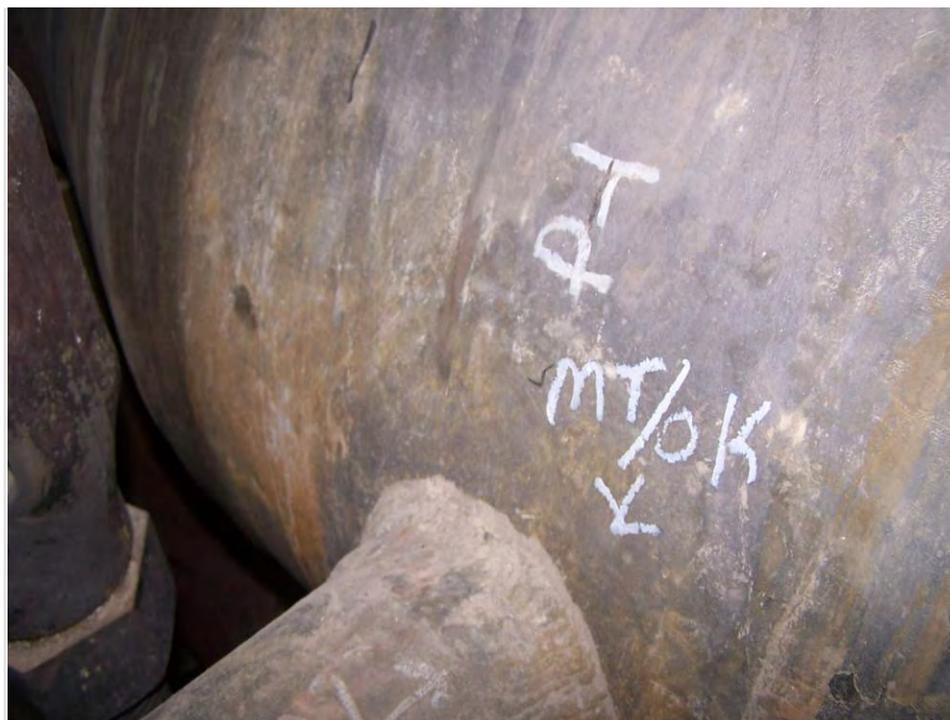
Photographs of the inspection locations on the Upper Finishing Superheater Outlet header.
